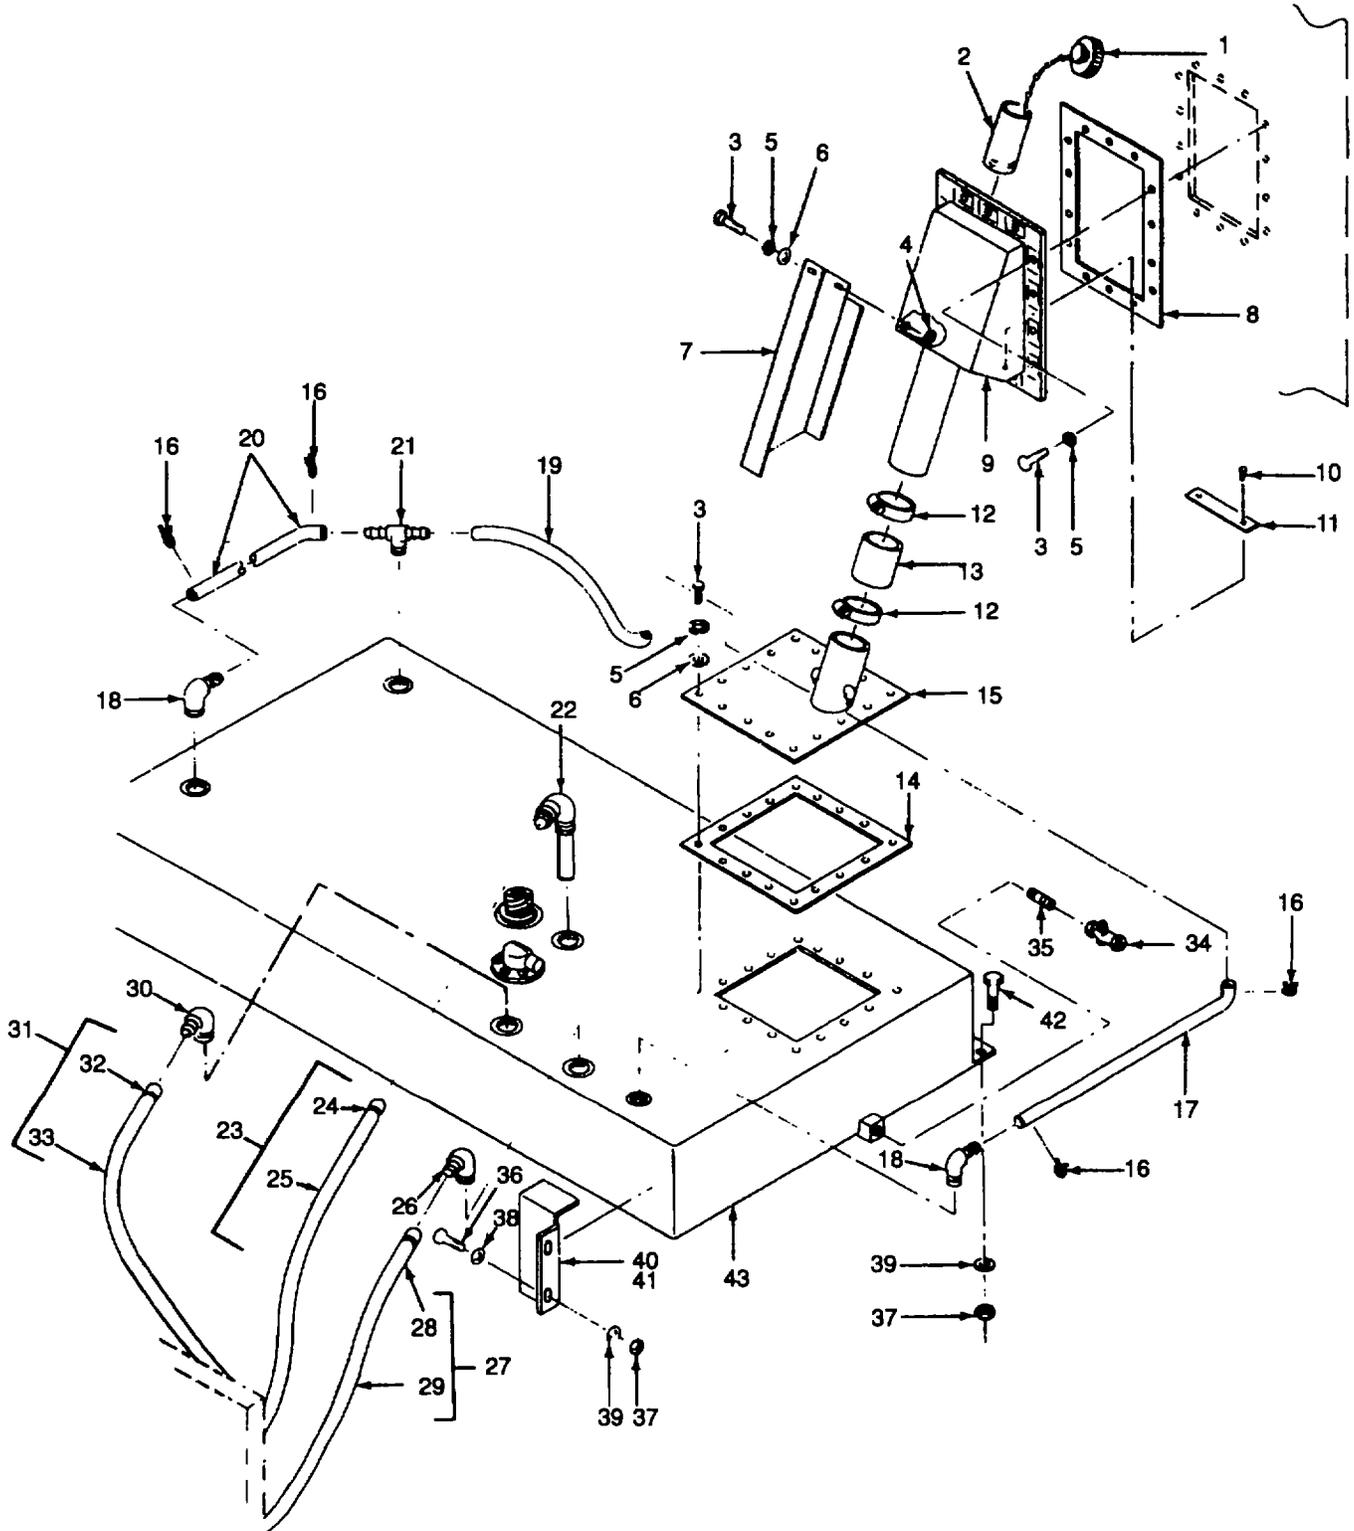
Fuel Tank, Exploded View (Sheet 1 of 2)
